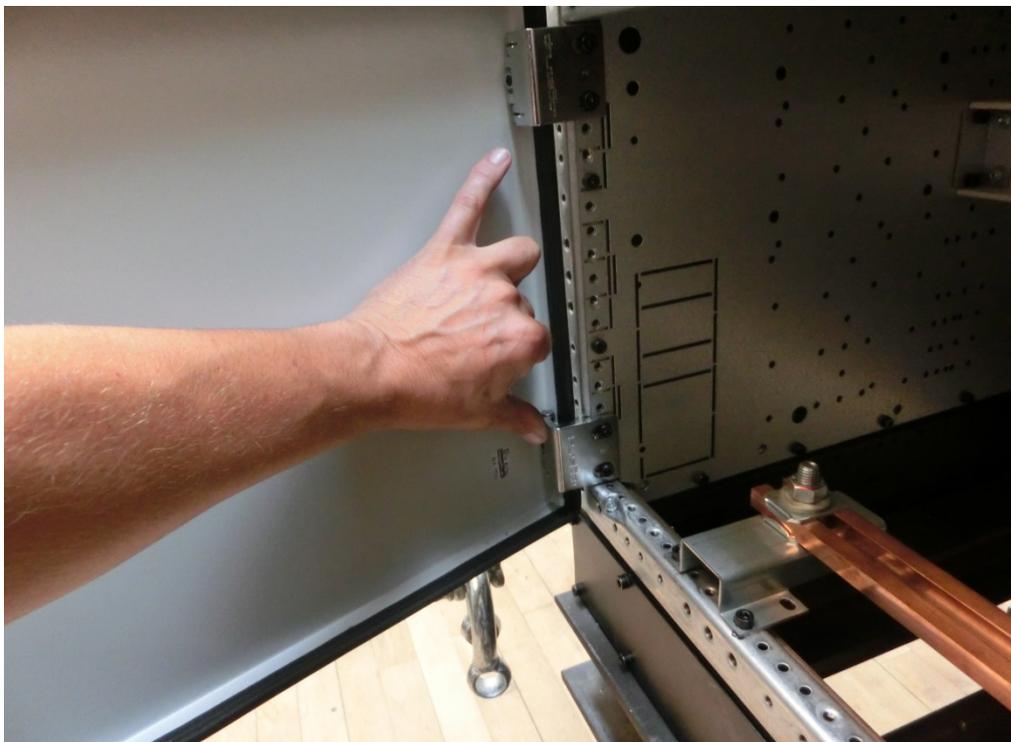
Visual Inspection after Y-axis: 2 front doors hinges loose.
